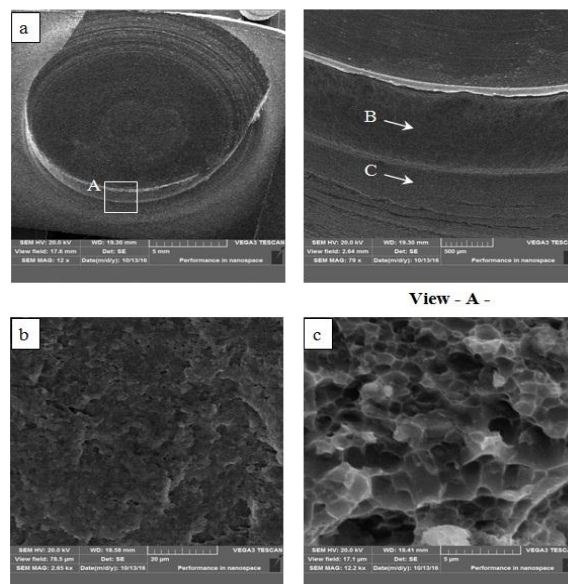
SEM fractographs of a refill FSSW specimen failed in plug-type on the upper sheet failure mode, (a) Overview of failed nugget on the lower sheet, (b, c) Magnified views of regions B and C marked in (view-A-), respectively
